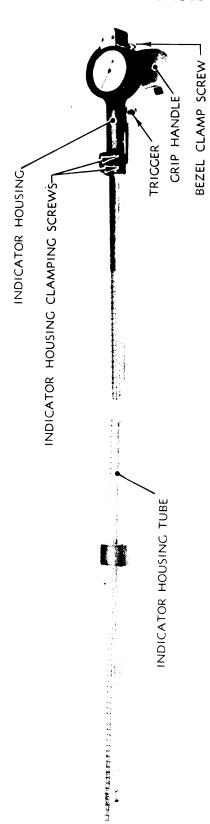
Indicator Housing Tube and Indicator Housing Assembly
